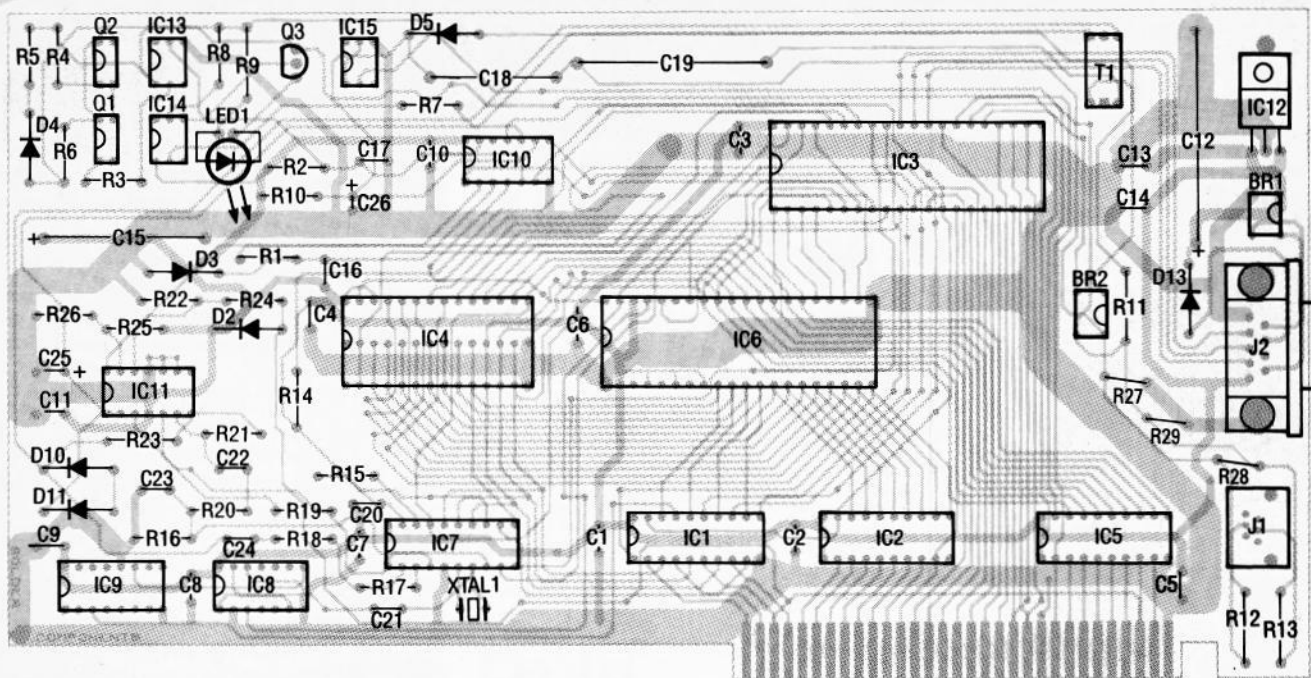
PARTS-PLACEMENT DIAGRAM. The card is assembled on a double-sided PC board that fits in an expansion slot on your motherboard.
